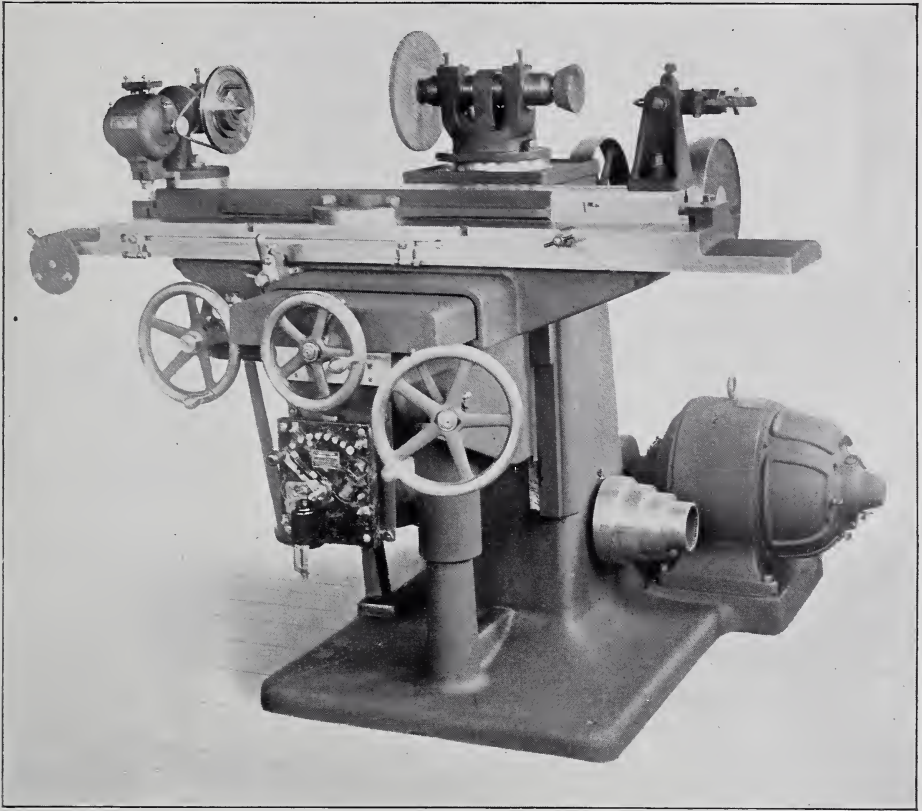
THE LATEST GRINDER MADE BY THE CINCINNATI MILLING MACHINE CO., CINCINNATI, OHIO.
